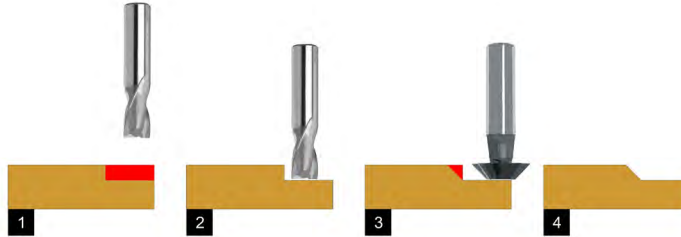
The “Wave” subtractive digital fabrication process scheme. A standard flat drill conducted the first part of milling. Second part of milling required 45-degree drill. *Source:* [Marcin Giedrowicz]
